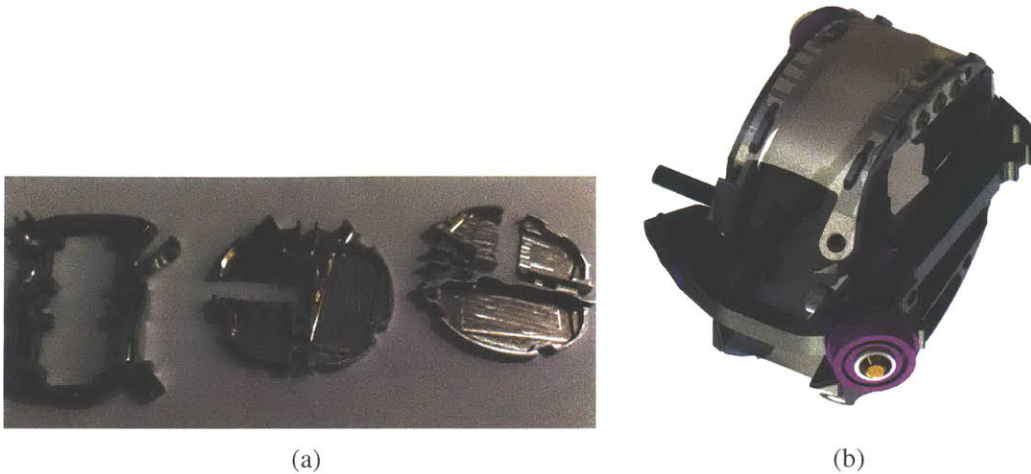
The frame was redesigned using CNC milled metal components (a) to make it more durable, and to better dissipate heat from the brushless motor. This design consists of three components CNC milled out of 3.2 mm 7075 aluminum alloy plate. These components together provide mounting locations for the electronics, motor, braking mechanism, and hold the two primary bearings (*pink rings*) in (b) which allows the core assembly to reorient to different planes. The primary design challenge in creating this assembly was the space constraints imposed by the need for the structure to rotate inside of the frame. This constraint effectively limits the space to be that of a sphere inside a cube which provides only 52 % of the original volume.
